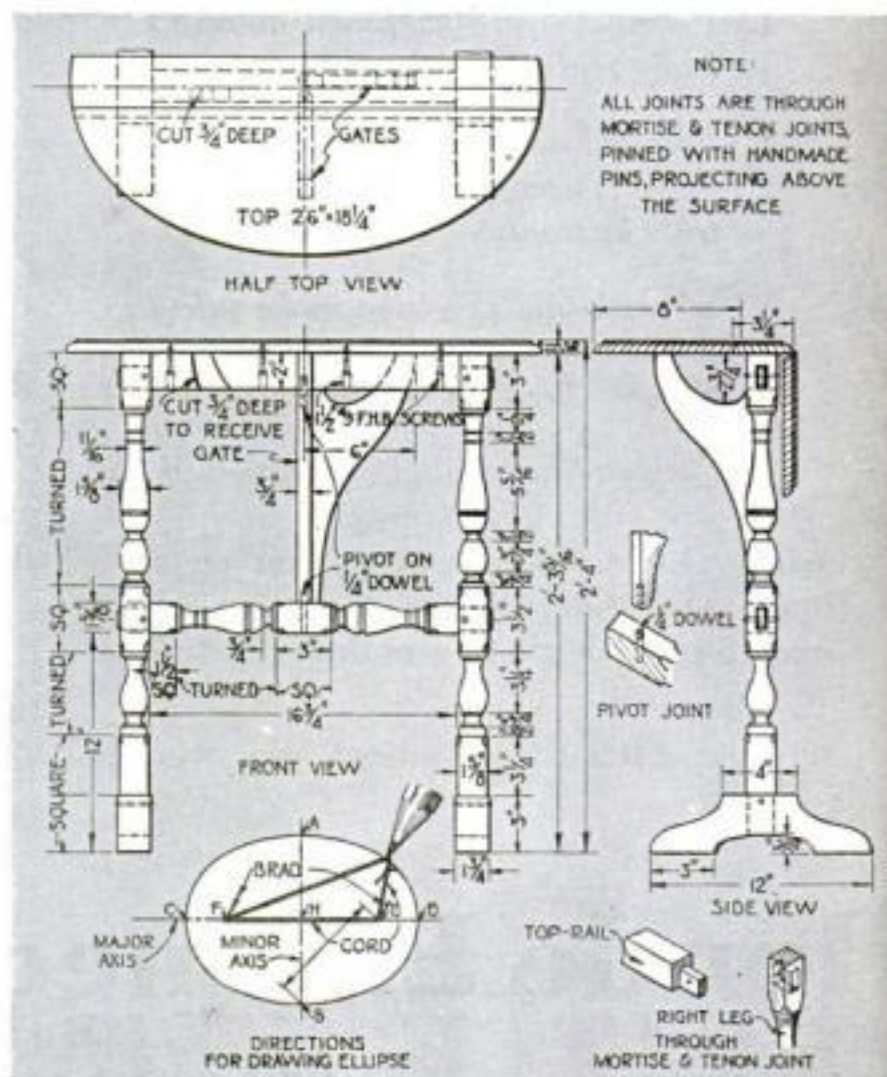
Dimensions of table; pivot piece; mortise and tenon joints held with handmade pins; and the method of drawing the ellipse.
